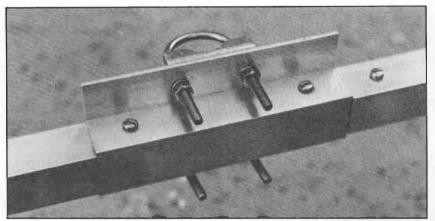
Photo D. Detail of the boom-to-mast bracket of the Sentech Q144-8. The brackets are aluminum stock, held in place by two stainless steel machine screws each. The screws are threaded into tapped holes in the boom.
